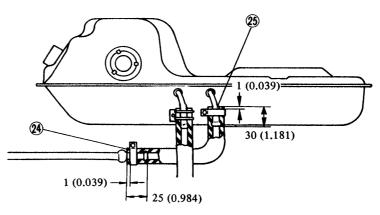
Fuel return pipe A to fuel return pipe rubber hose
